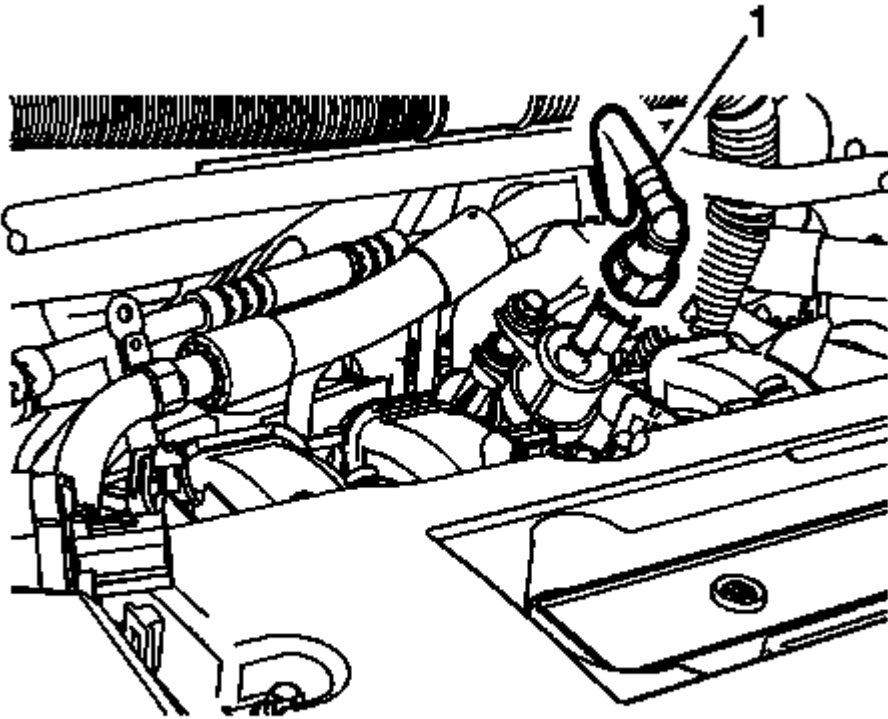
Evaporative Emission Canister Purge Solenoid Valve Hose
